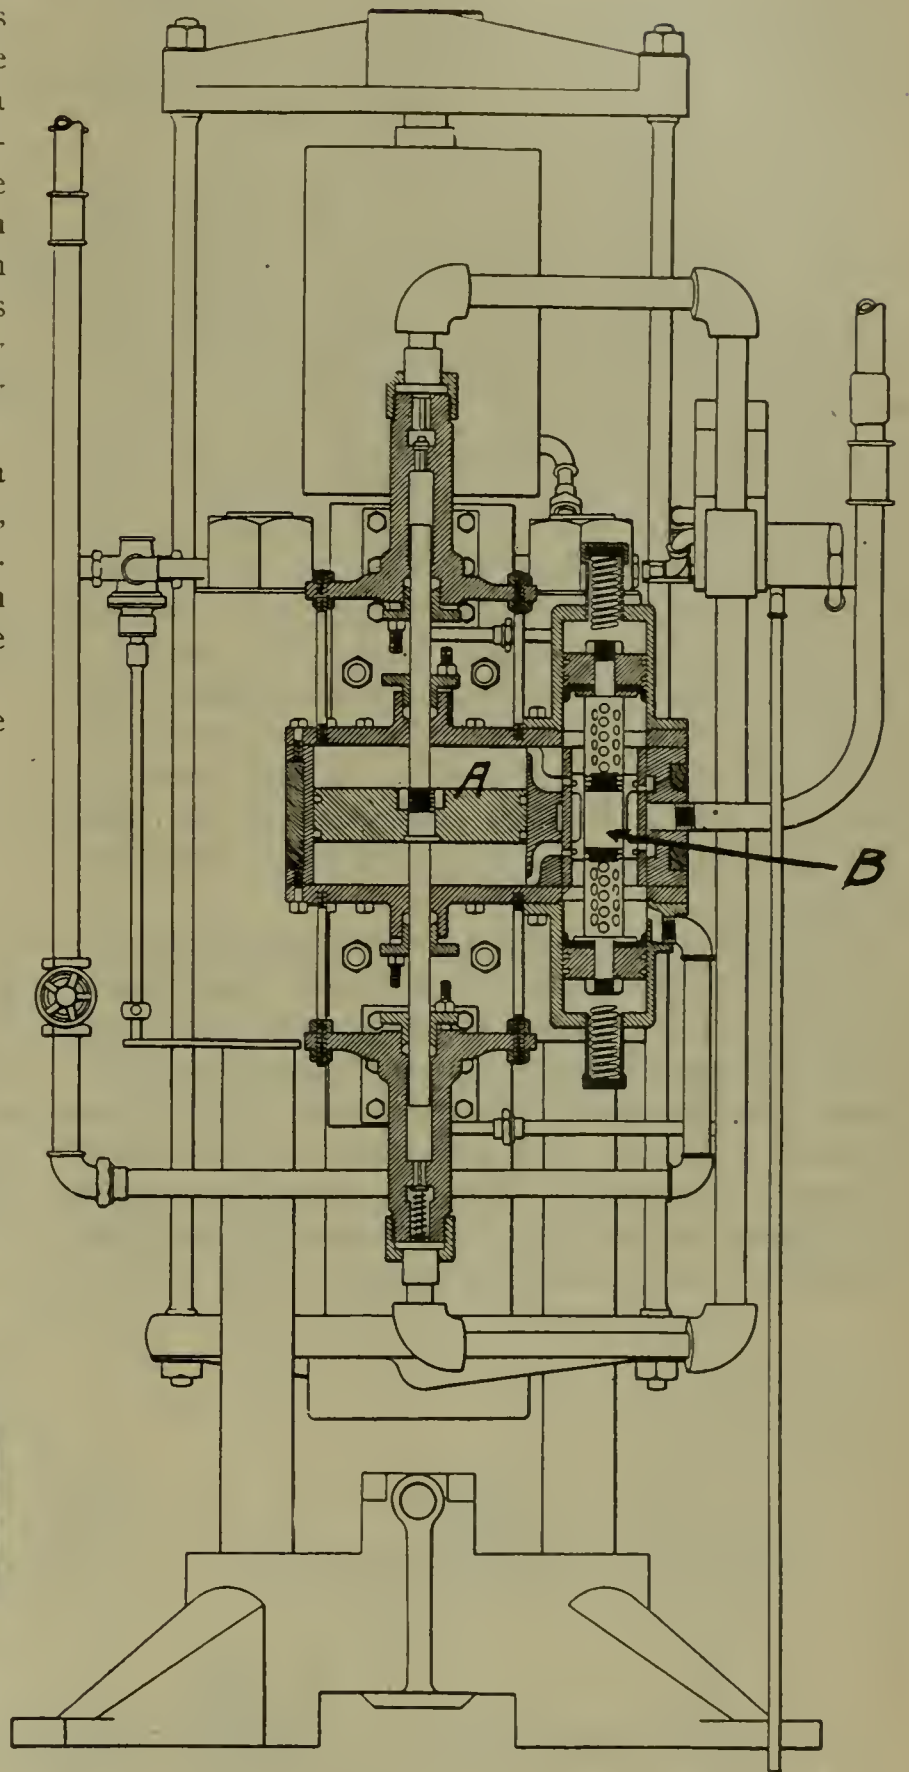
SEC. OF HYDRAULIC SHEAR FOR COUPLER RIVETS.—L. S. & M. S. RY.
